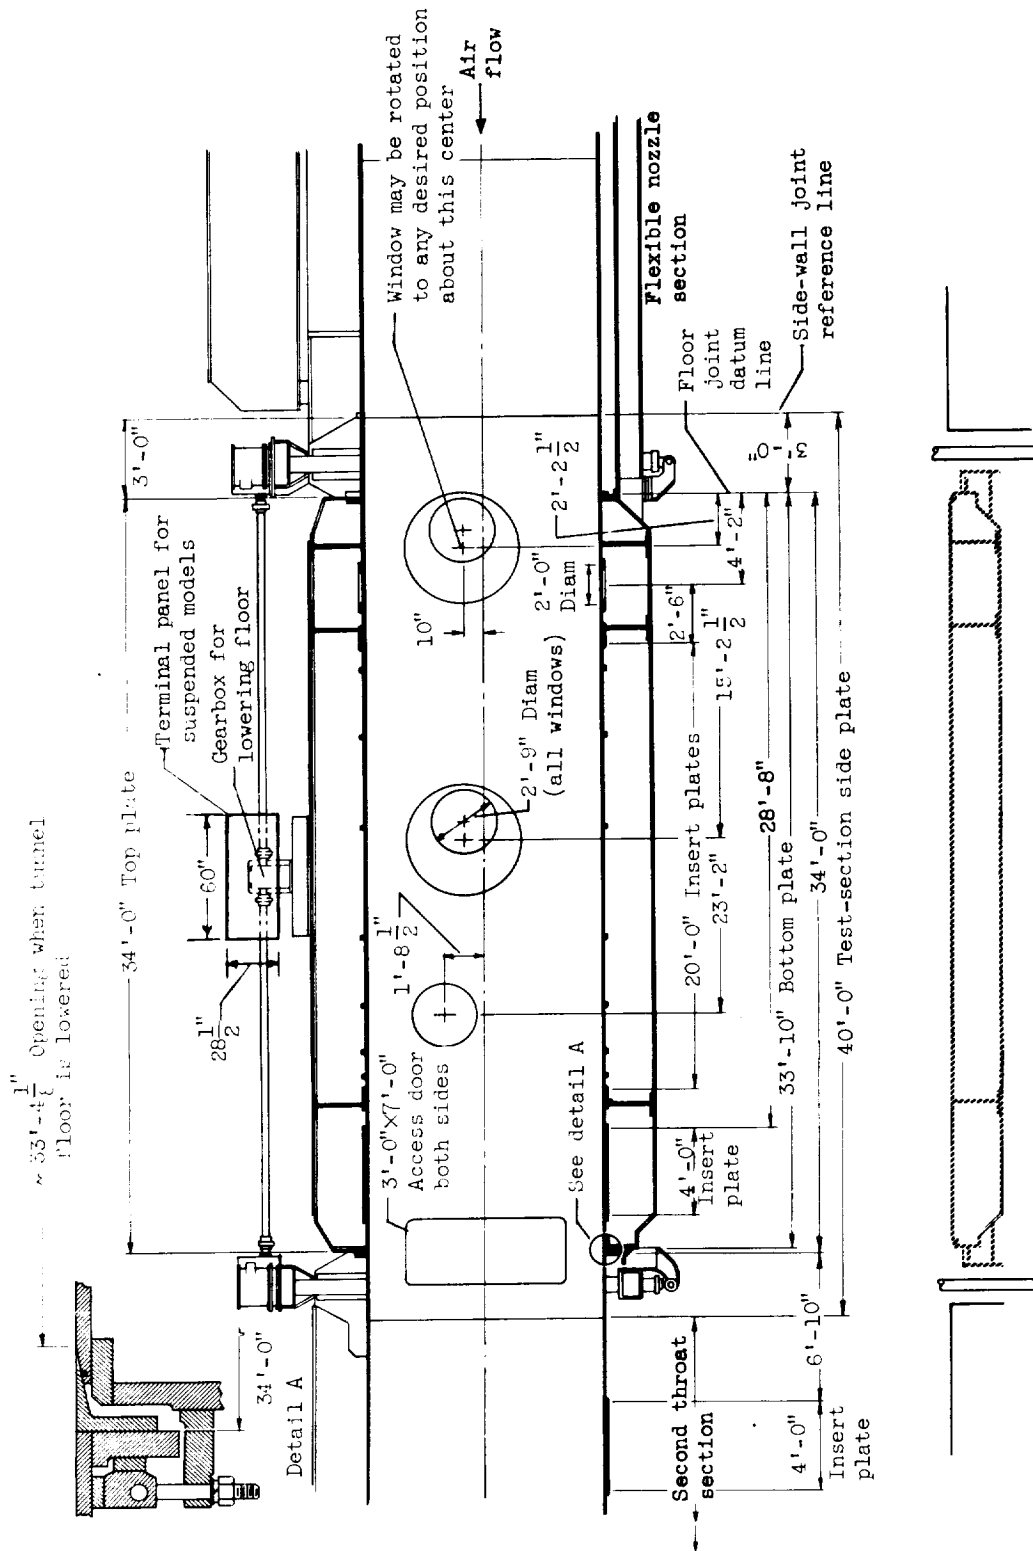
10- by 10-foot test section, Lewis Unitary Plan Wind Tunnel.
